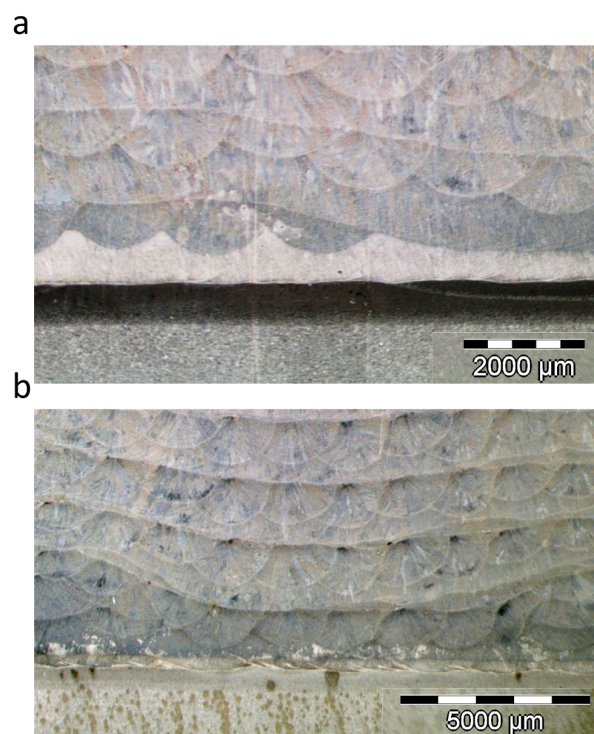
Cross-sections of the samples showing a detailed view of the defect correction. (a) Step defect correction; (b) Pocket defect correction.
